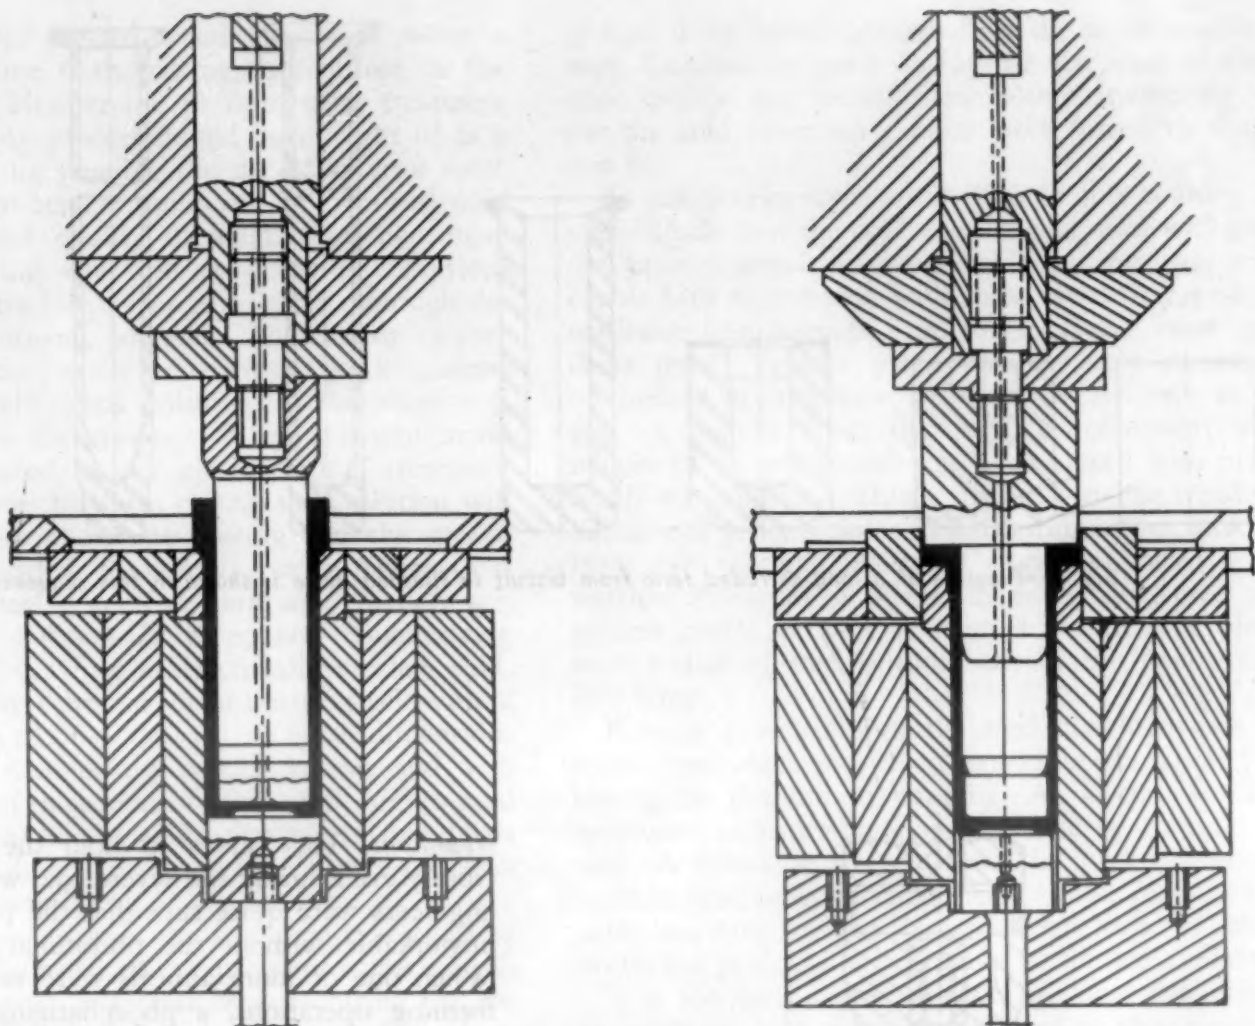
Another multi-step process accomplishes the forming of this part, in which a counter-action punch regulates the bottom of the piece and also presses the top flange.
